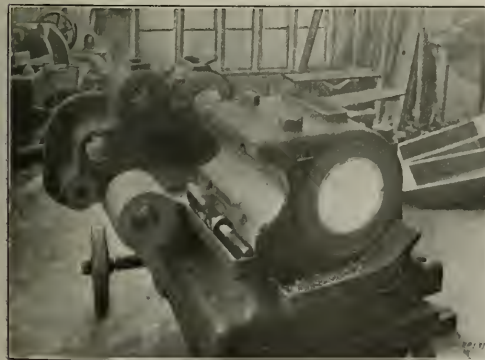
Large Headstock Frame, with Babbitt-lined Bearings. Note Hammered or Peened Appearance of Left-hand Bearing.
